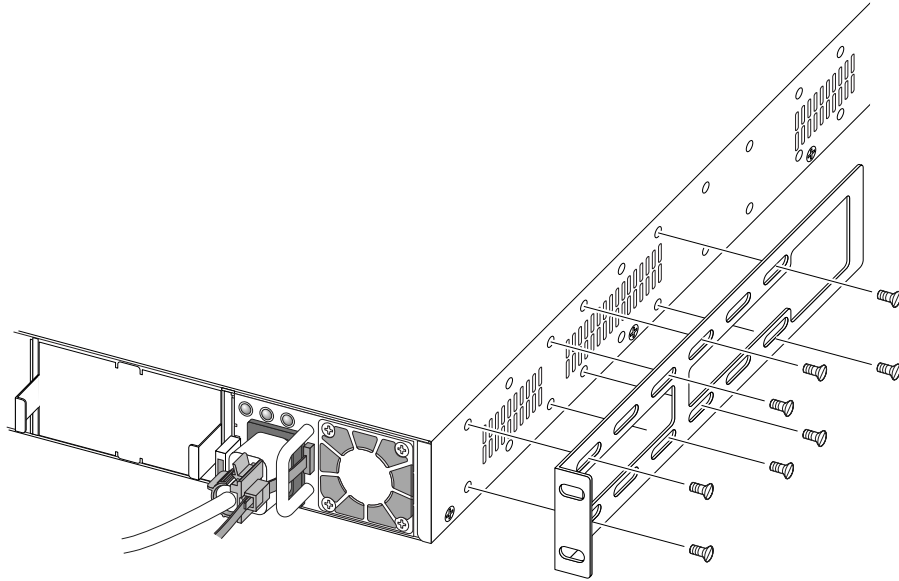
Attaching the Mounting Bracket to the EPS-C2 Chassis
